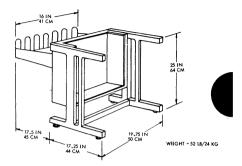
Cabling, Dimensions, Weight, Mounting Clearances, and Air Flow (Sheet 13 of 17)
